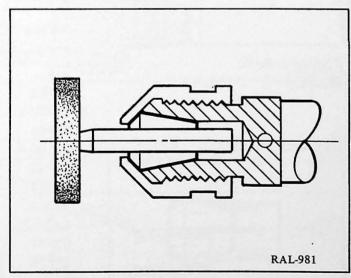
INTERNAL GRINDING ATTACHMENT 1/4" COLLET
